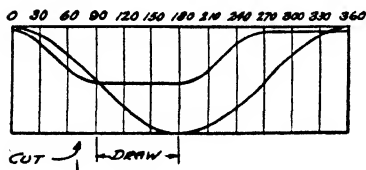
Movements of the crank-actuated drawing slide and cam-controlled cutting and holding slide of cam presses similar to Fig. 275.
